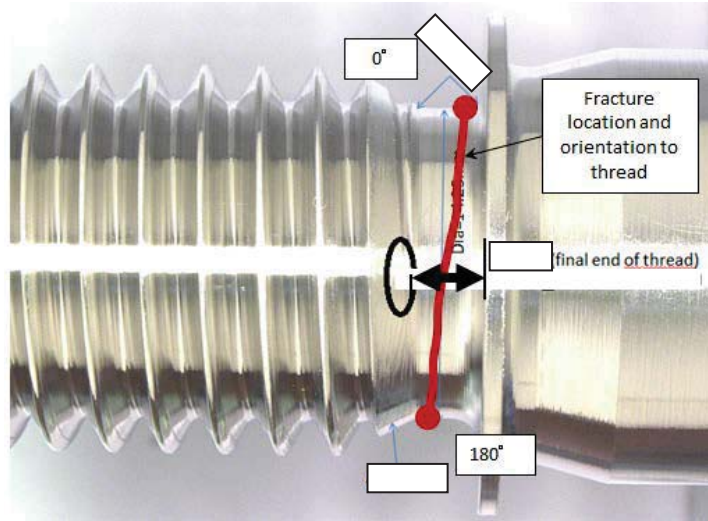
Close-up view of lower end Connecting Bolt threads showing minor thread.
